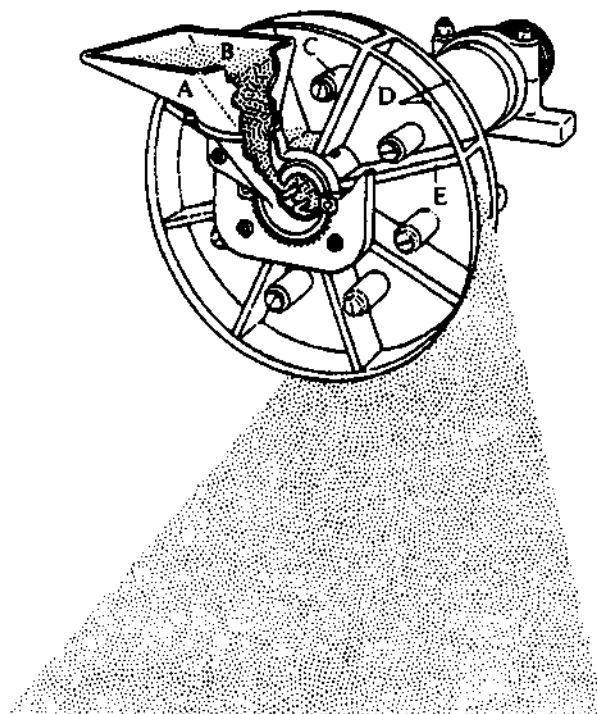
B8c-1 The wheel mechanism that uses centrifugal force to propel the grit, metal shot, glass beads, or sand in a blast cleaning machine. (Courtesy Wheelabrator. Wheelabrator is a registered trademark of Wheelabrator Technologies, Inc.)
